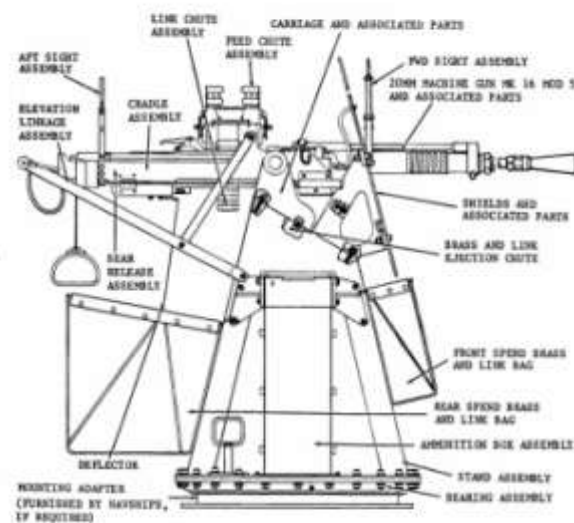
Mount, Machine Gun, Mk 47 Mod 3
